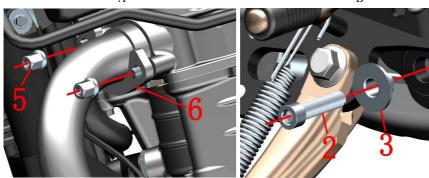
MUFFLER		Muffler front assembly 1	CHK	(0)
